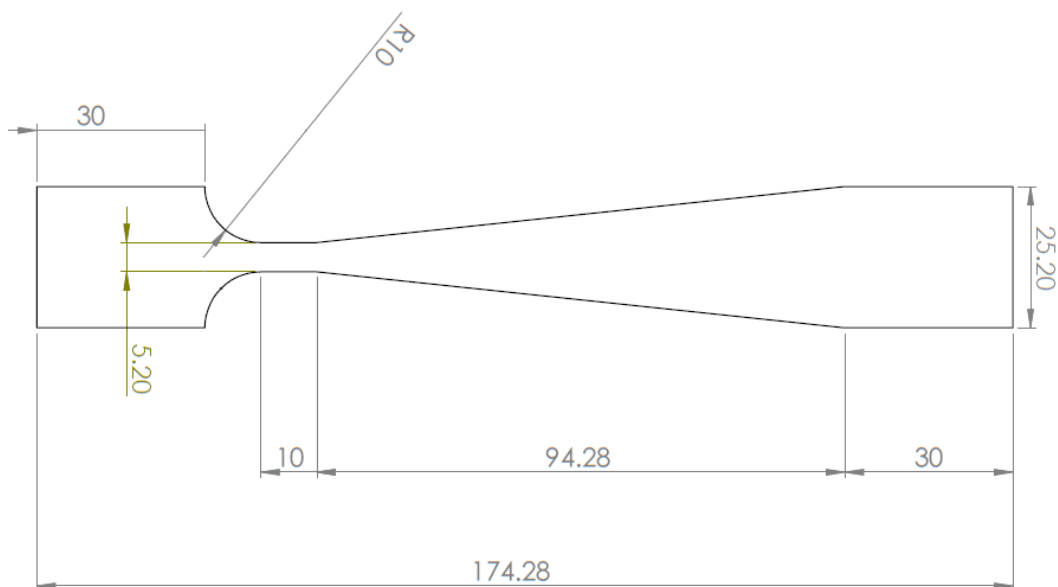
Design drawing of tapered specimen. All dimensions in mm.
